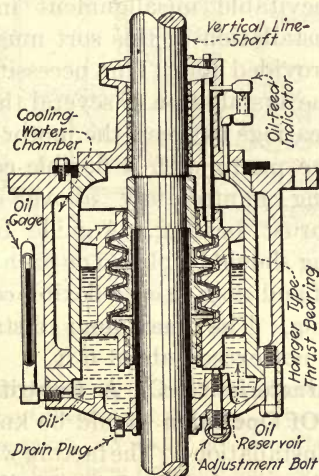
Sectional View Of Hanger-Type Thrust Bearing For Vertical Centrifugal Pumps. (Worthington Pump And Machinery Corp.)
